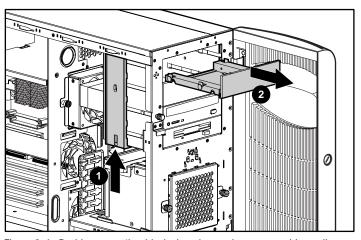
Pushing up on the drivelock and removing a removable media device blank
